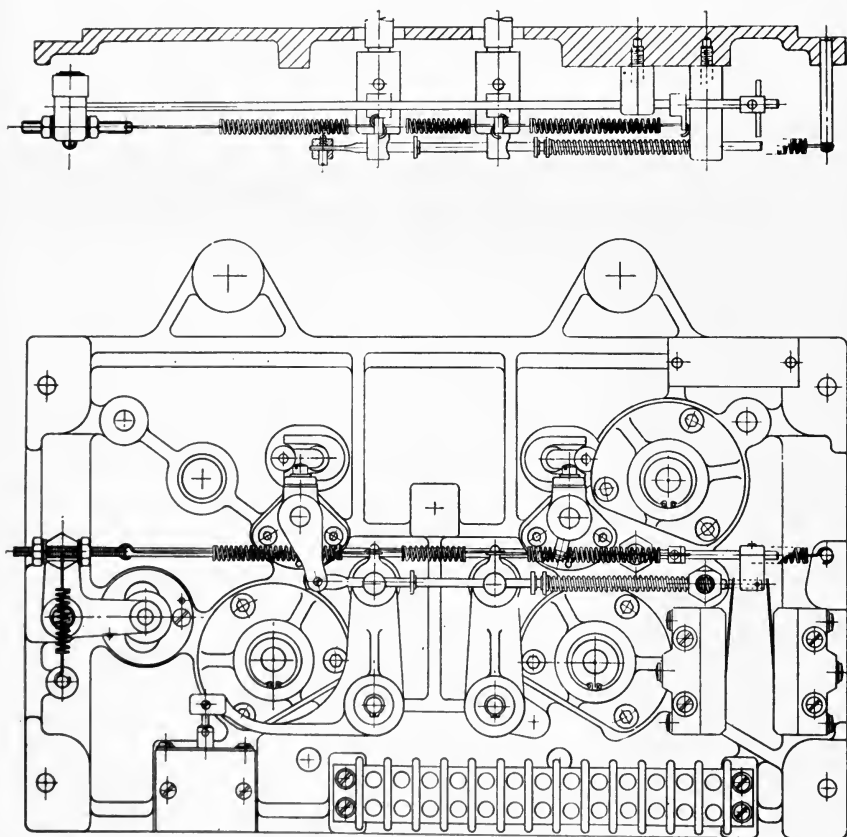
PR-42 Film-Drive Mechanism with motor and flywheels removed.
